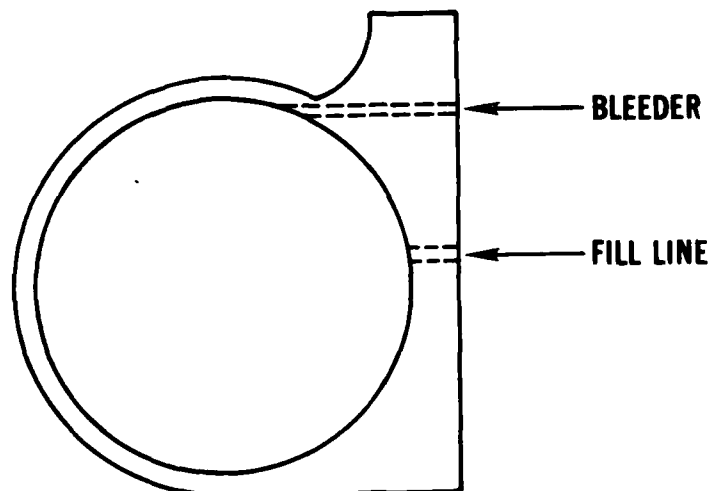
Cross-Sectional Diagrams of Wheel Cylinders Showing Location of Line and Bleeder Holes .
